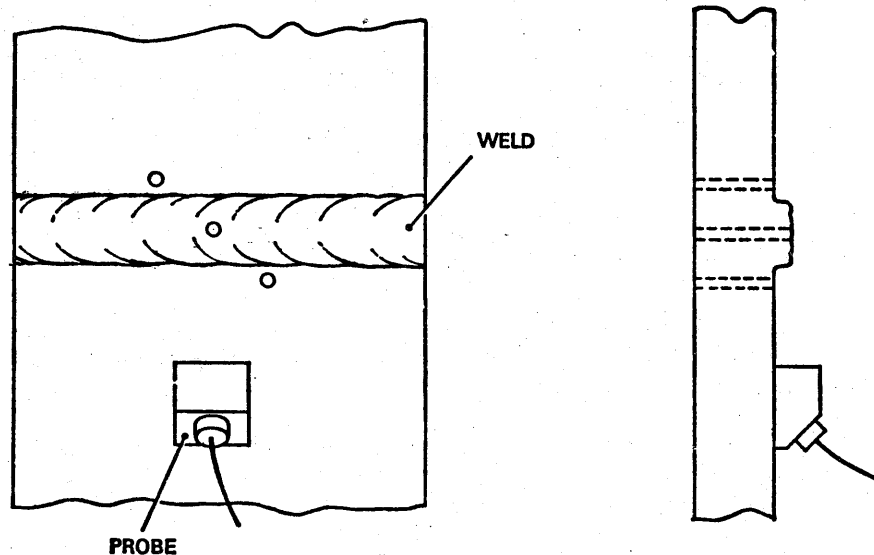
TEST HOLES IN WELD SAMPLE
